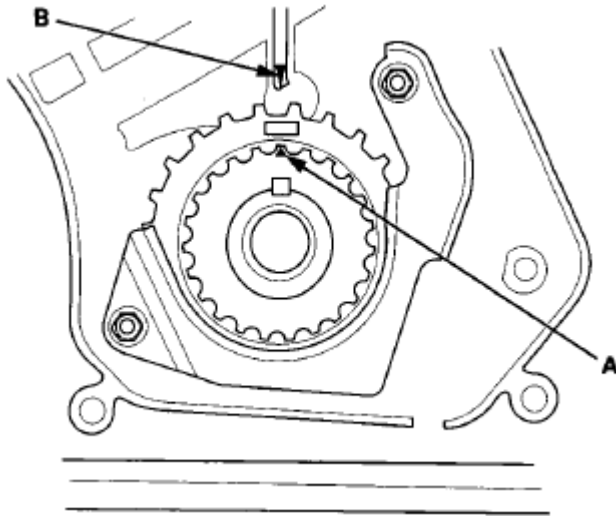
Identifying TDC Mark And Pointer On Oil Pump
